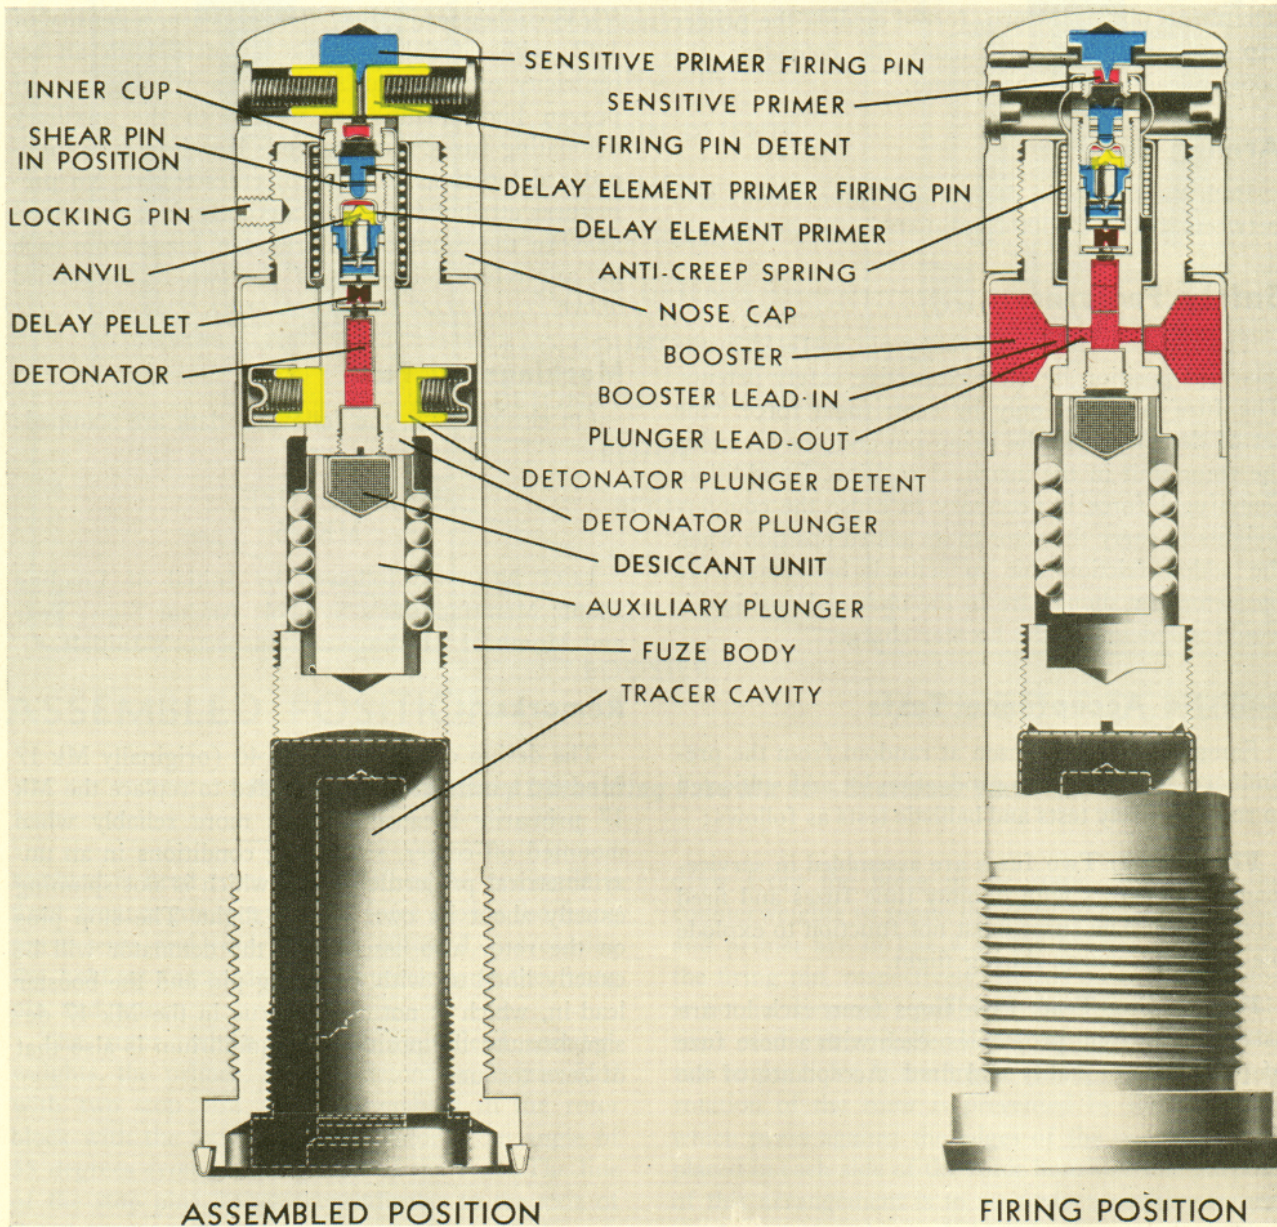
Base Detonating Fuze Mk 48—Sectional View
